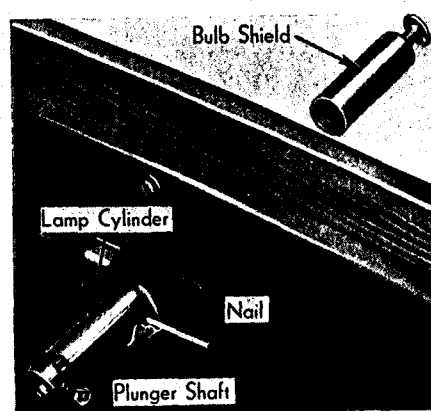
The bulb shield may be unscrewed after the holes in the lamp cylinder and the plunger have been lined up and a nail inserted to hold the plunger.
